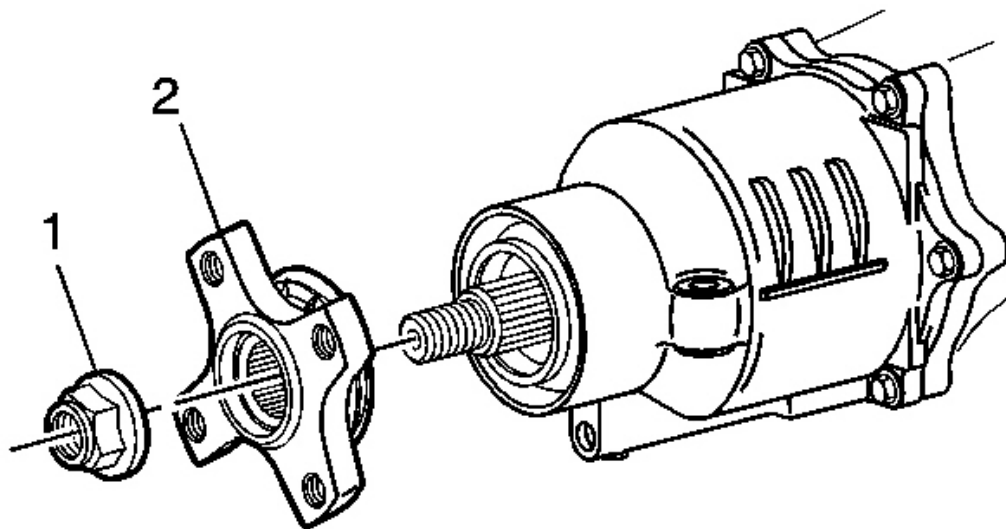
Removing/Installing Input Flange On The Clutch Shaft
